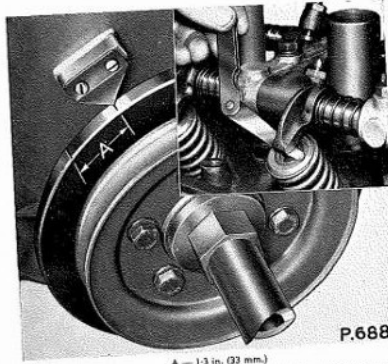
Checking the valve timing using the pointer on the timing cover and the groove on the damper rim (inset shows a .0015 in. (.038 mm.) feeler gauge just gripped by number 1 cylinder inlet rocker, when dimension "A" is attained)
